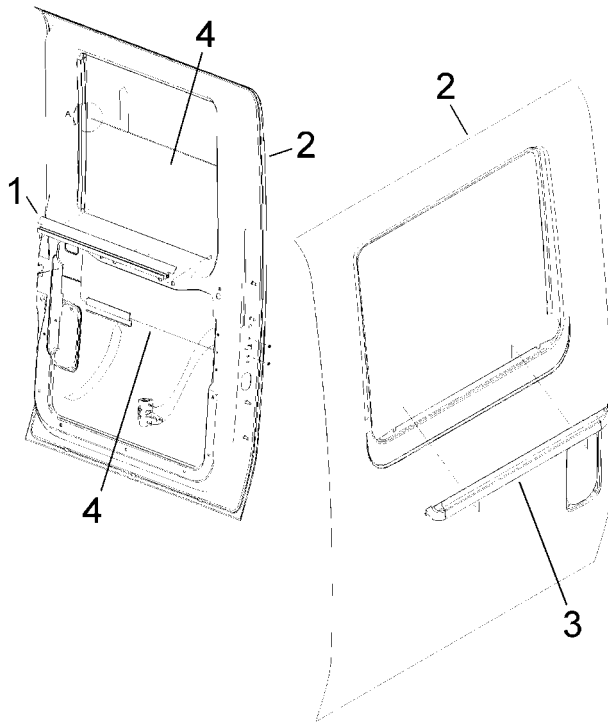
Remove Rear Cab Door Glass Seal and Inner/ Outer Belt
